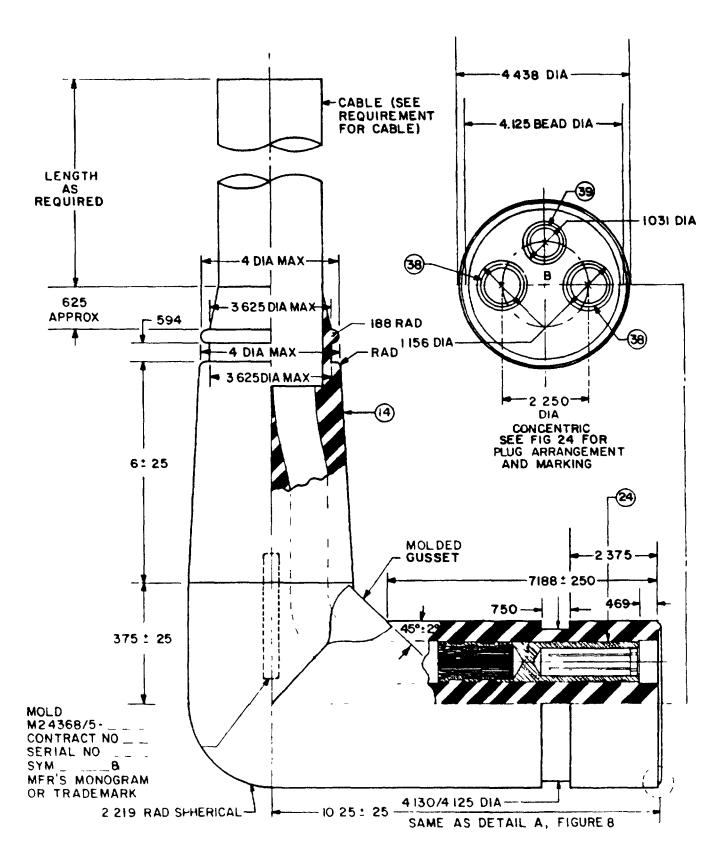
Angled plug assembly, typical. (03) (04) (05) (06) (07)
